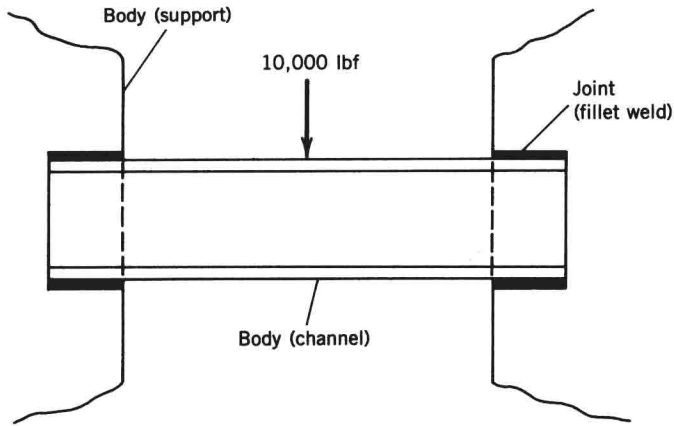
Channel beam welded at ends and loaded in the middle.
